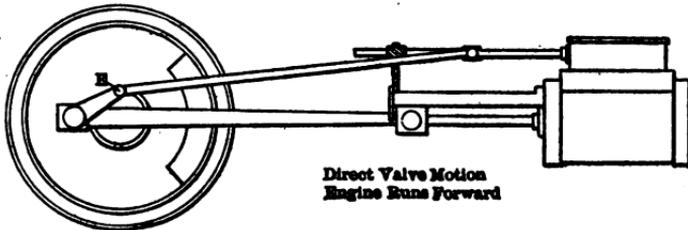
The Simplest Form of Steam Engine; Direct Valve Motion.
